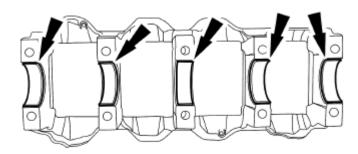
Locating Crankshaft Courtesy of FORD MOTOR CO.
